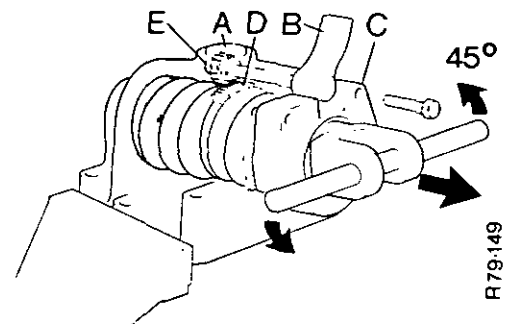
DISASSEMBLY OF THE SELECTIVE SENSING UNIT
